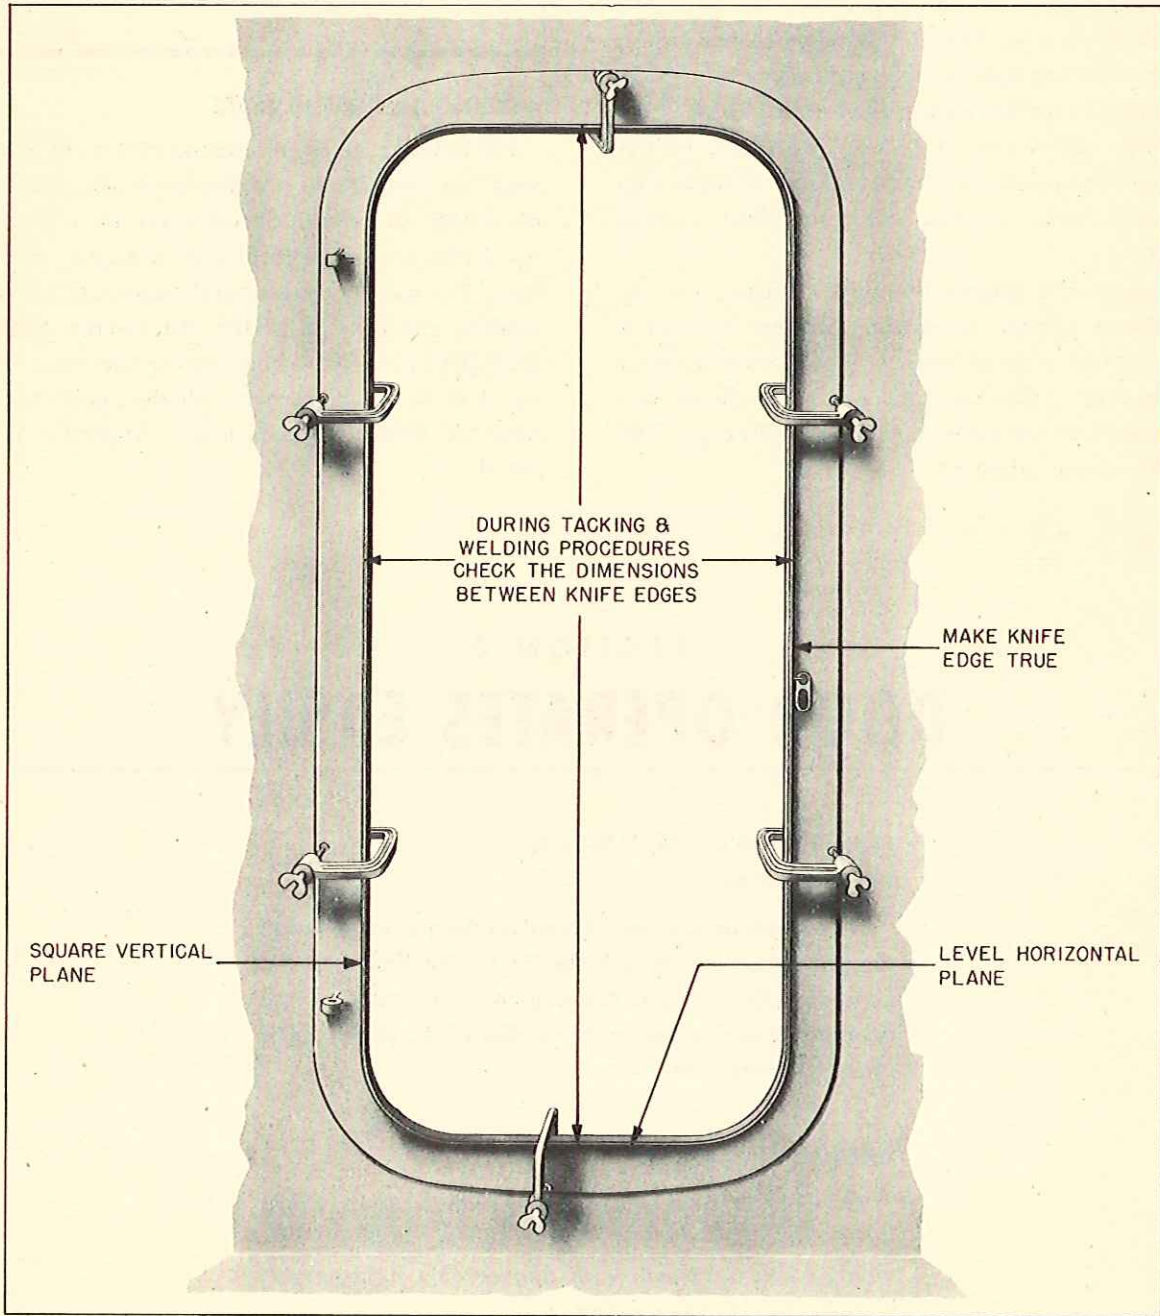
Outside view, door frame clamped in bulkhead ready for tacking.
